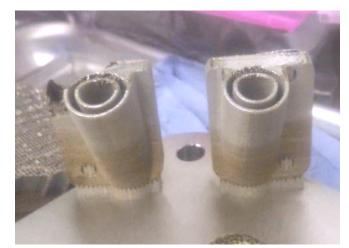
A failed print of the Ackerman bosses on the SLM metal 3D printer. An error in the machined caused the top portions of the parts to melt and become unusable.
